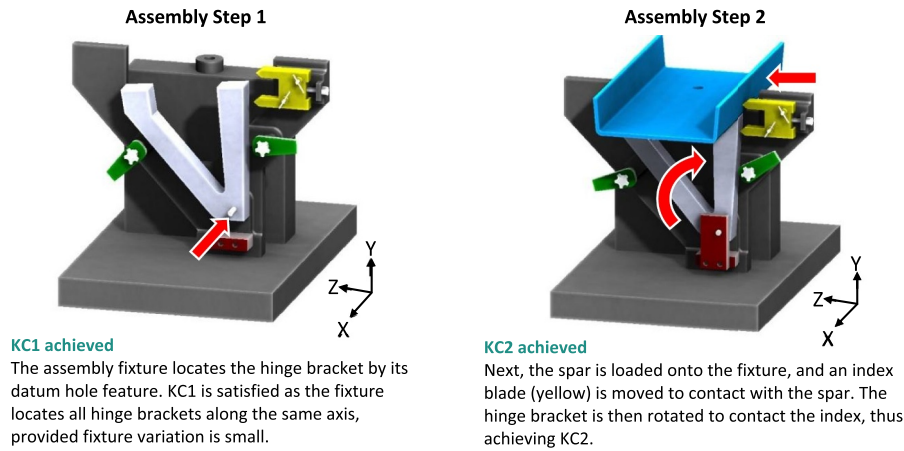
Assembly technique, including the achievement of KC1 and KC2.
